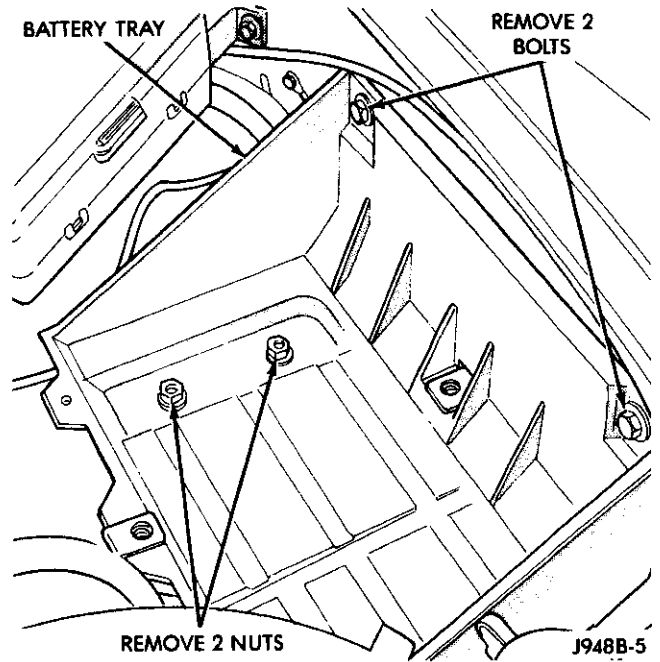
Battery Tray Upper Mounting Bolts/Nuts
